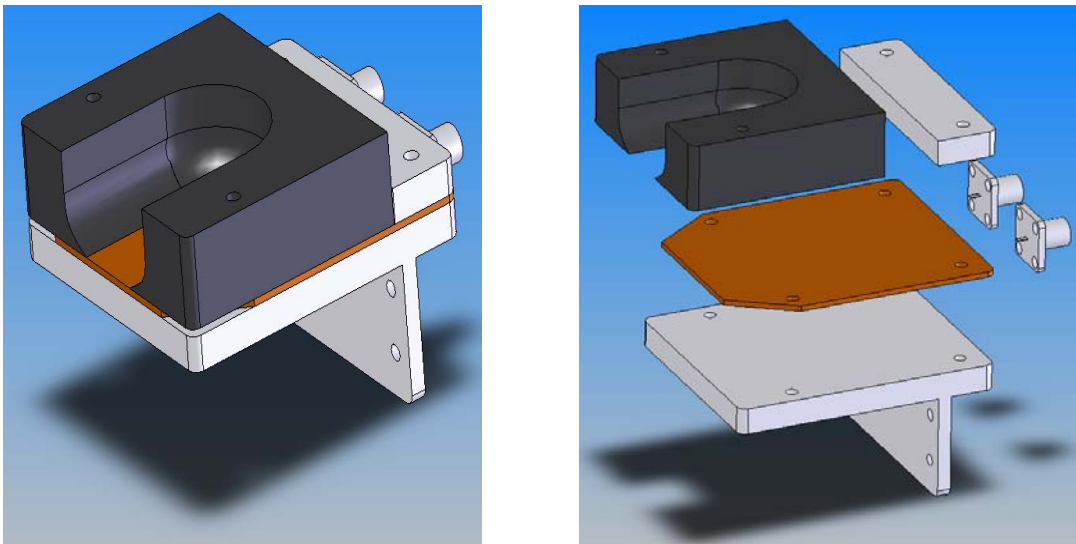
Standard view and exploded view of thumb guide, sensor, SMA connectors, and metal pieces
